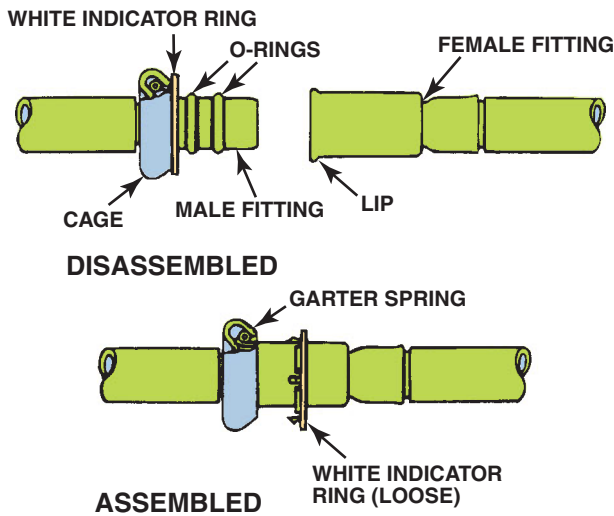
Some Ford metal line connections use spring-locks and O-rings.
